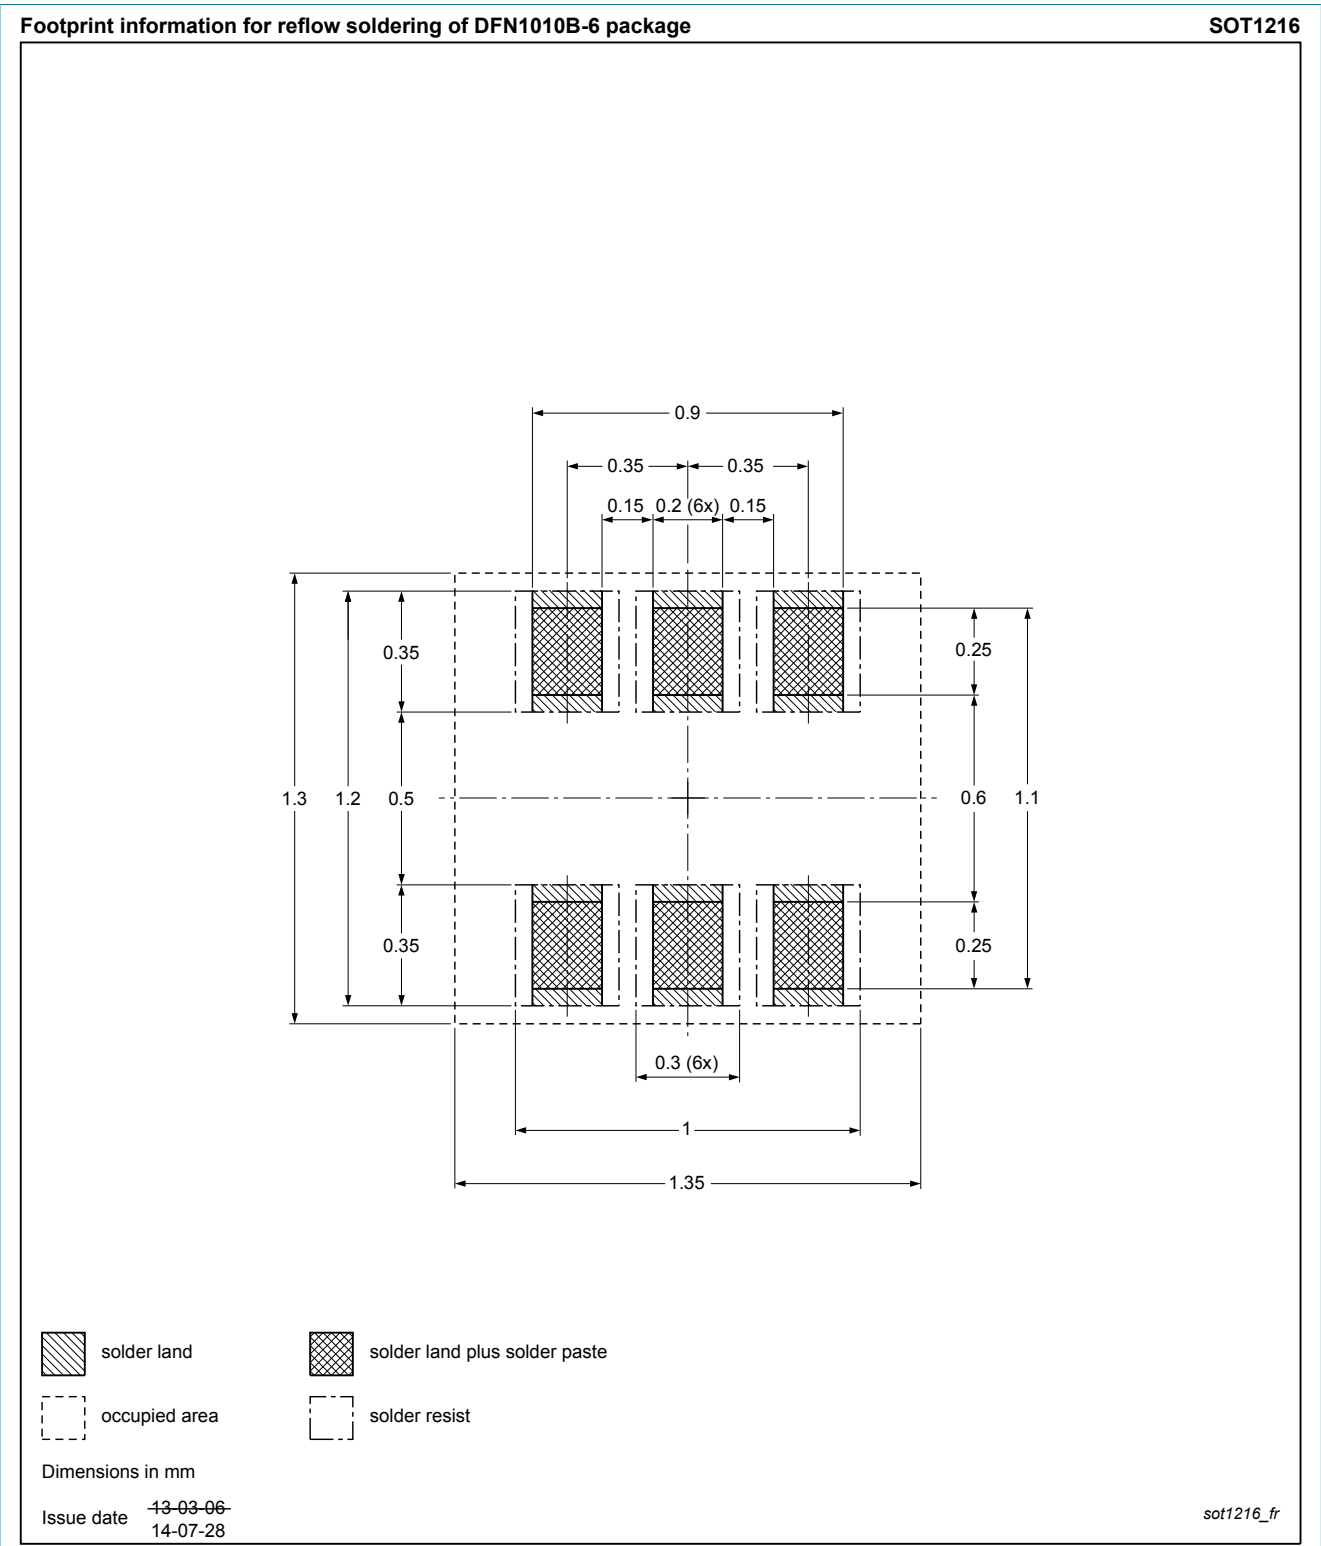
Reflow soldering footprint for DFN1010B-6 (SOT1216)
